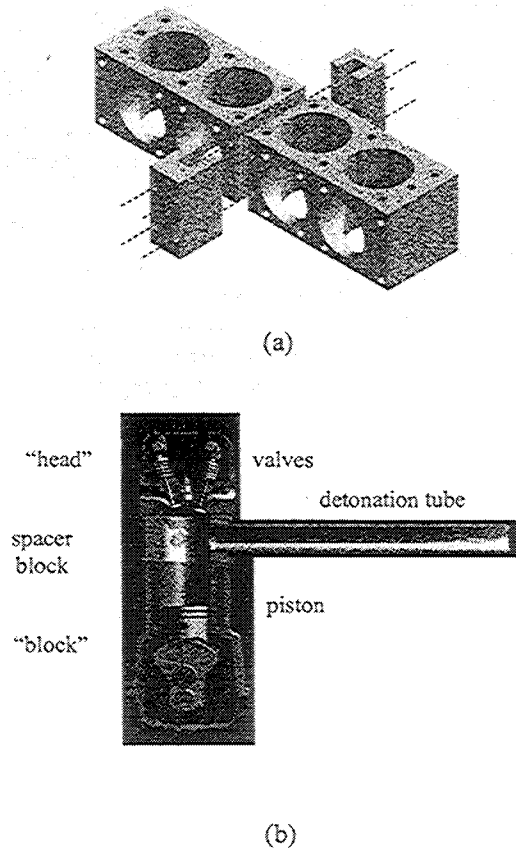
Spacer block: a) 3D cad drawing and b) Drawing of a cross section of the assembled hybrid piston-PDE
